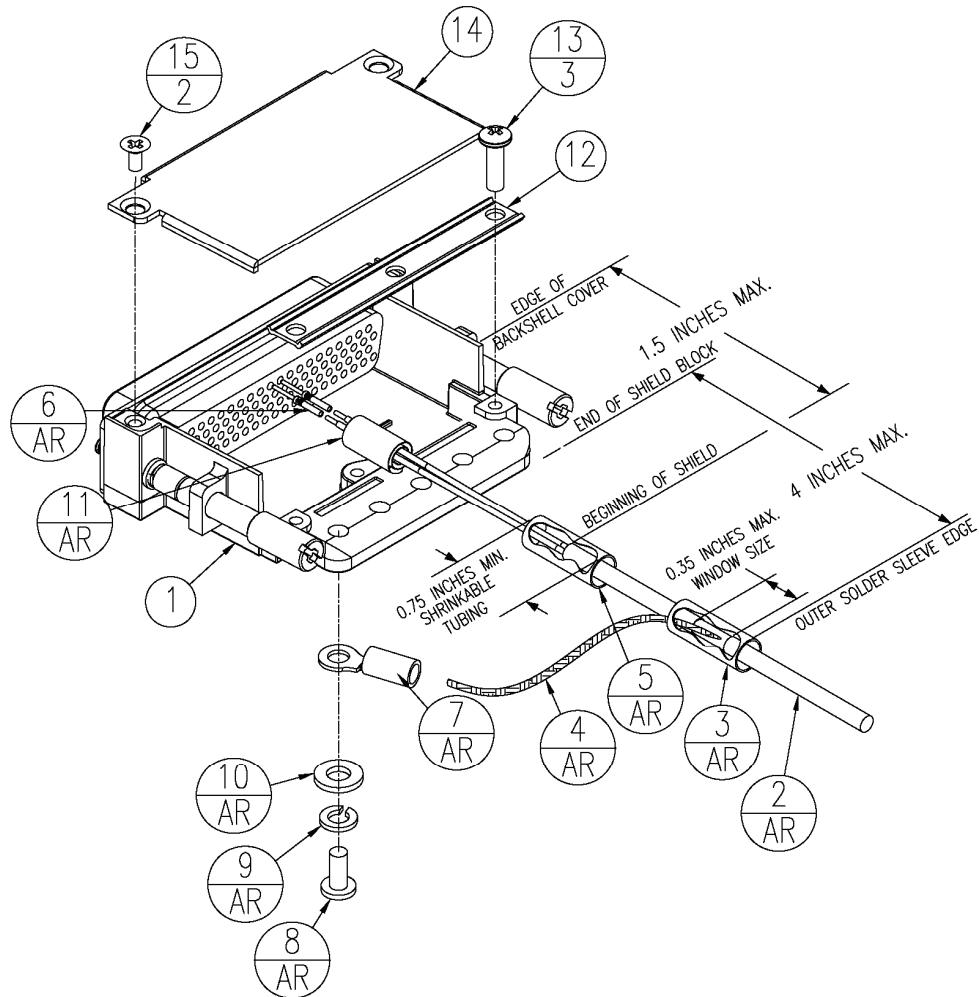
Shield Install onto a Jackscrew Backshell (78 pin example)
